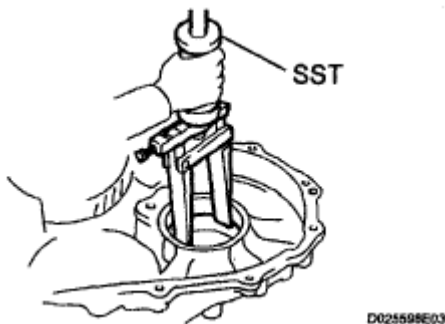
Removing Front Differential Case Rear Tapered Roller Bearing Outer Race And
